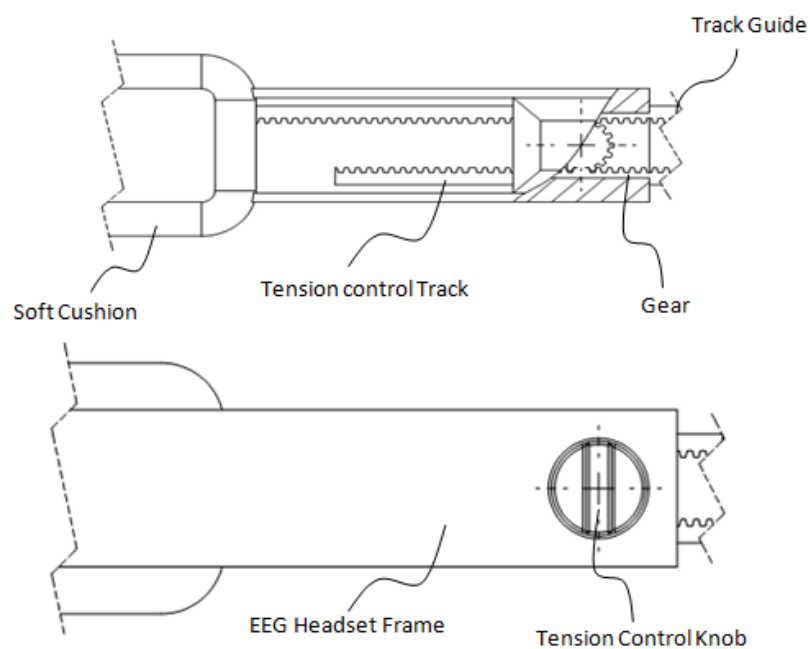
Tensioning Mechanism of the EEG Headset Mount
